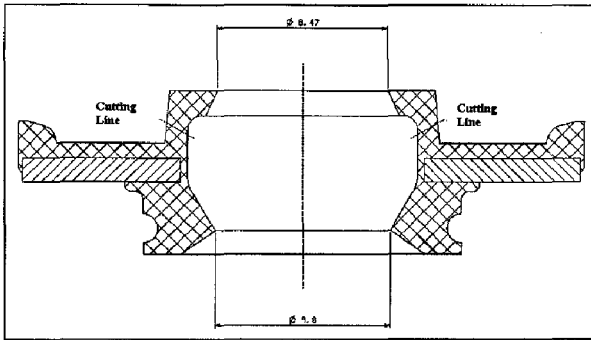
Cross section of the PL3-707 seal used for friction measurement.
